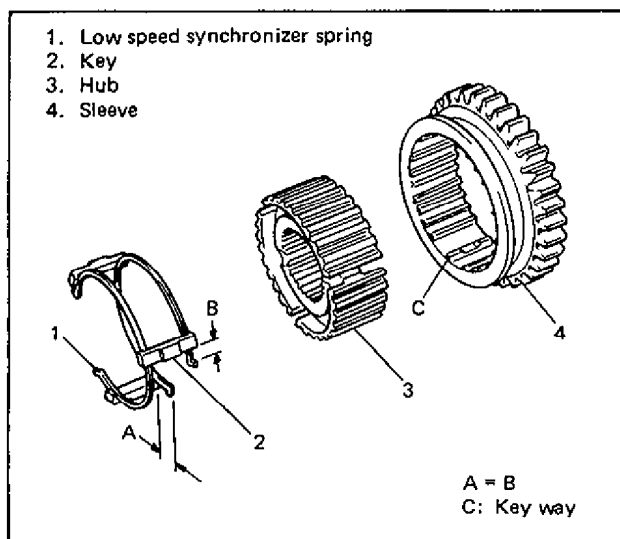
A-54 Assembling Low Speed Sleeve & Hub
